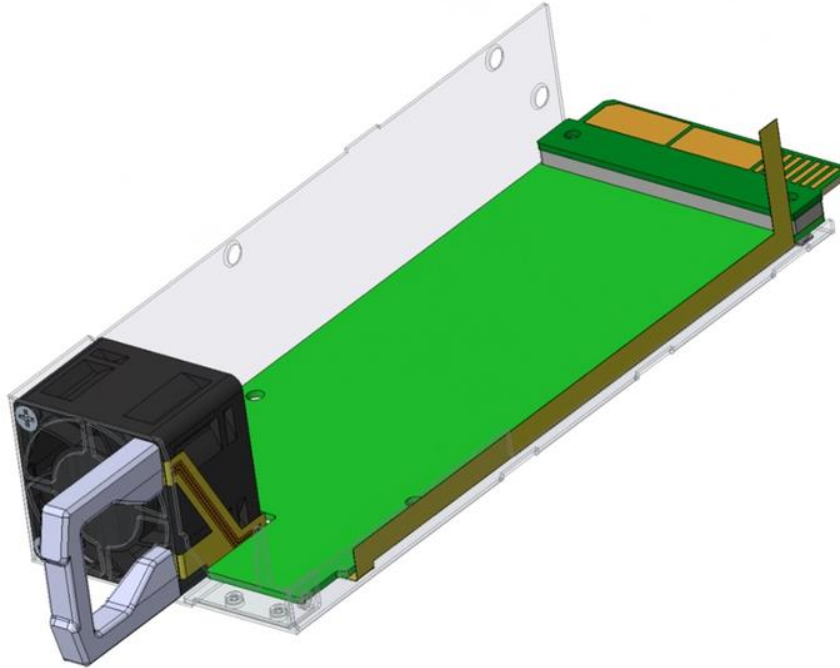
Flex PCB with LEDs installed in a 185mm by 73.5mm form factor as example
